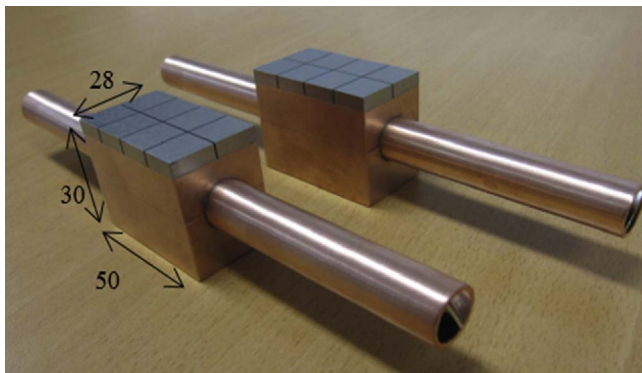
Flat-tungsten brazed mockups with cooling tube for high heat flux test.
